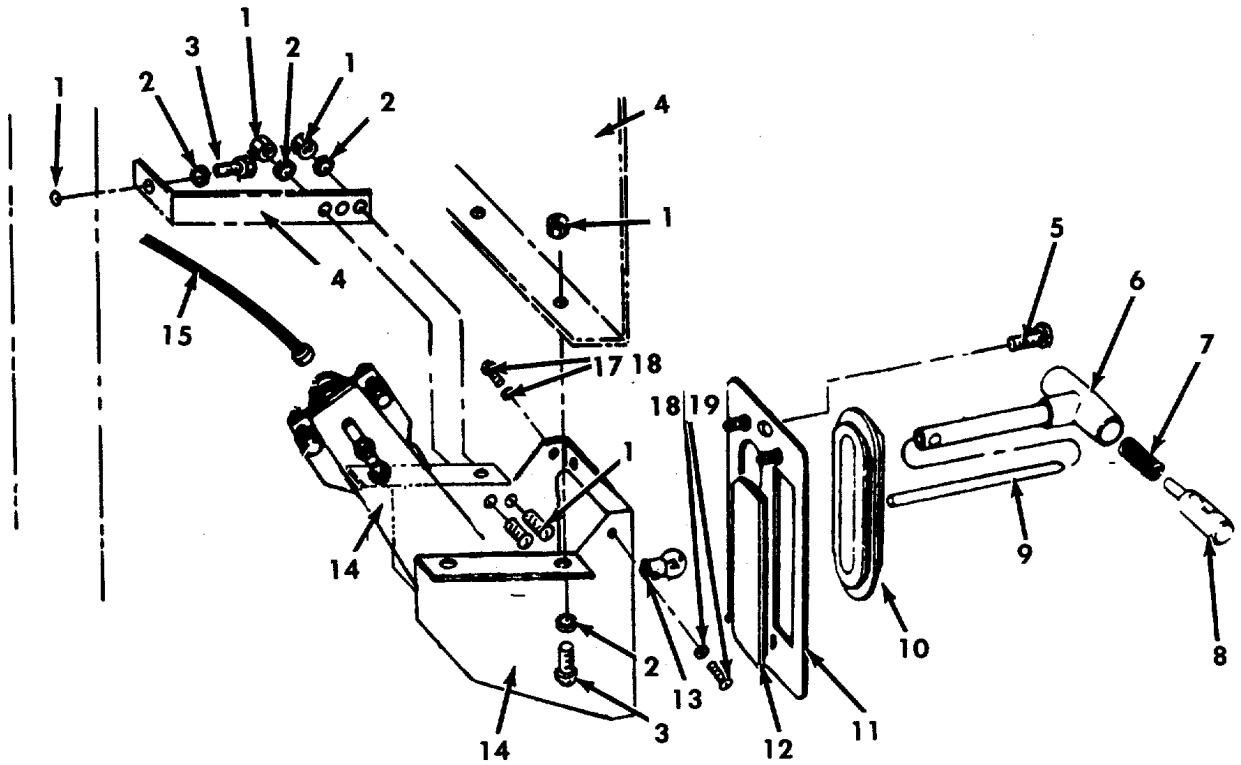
Oil Cooler Piping and Oil Level Gauge
